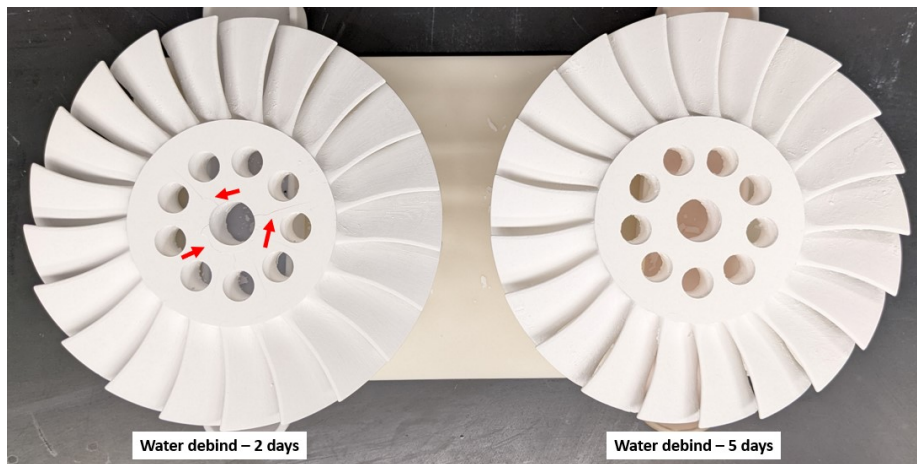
Trailing edge turbine rotor designs after binder burnout.
